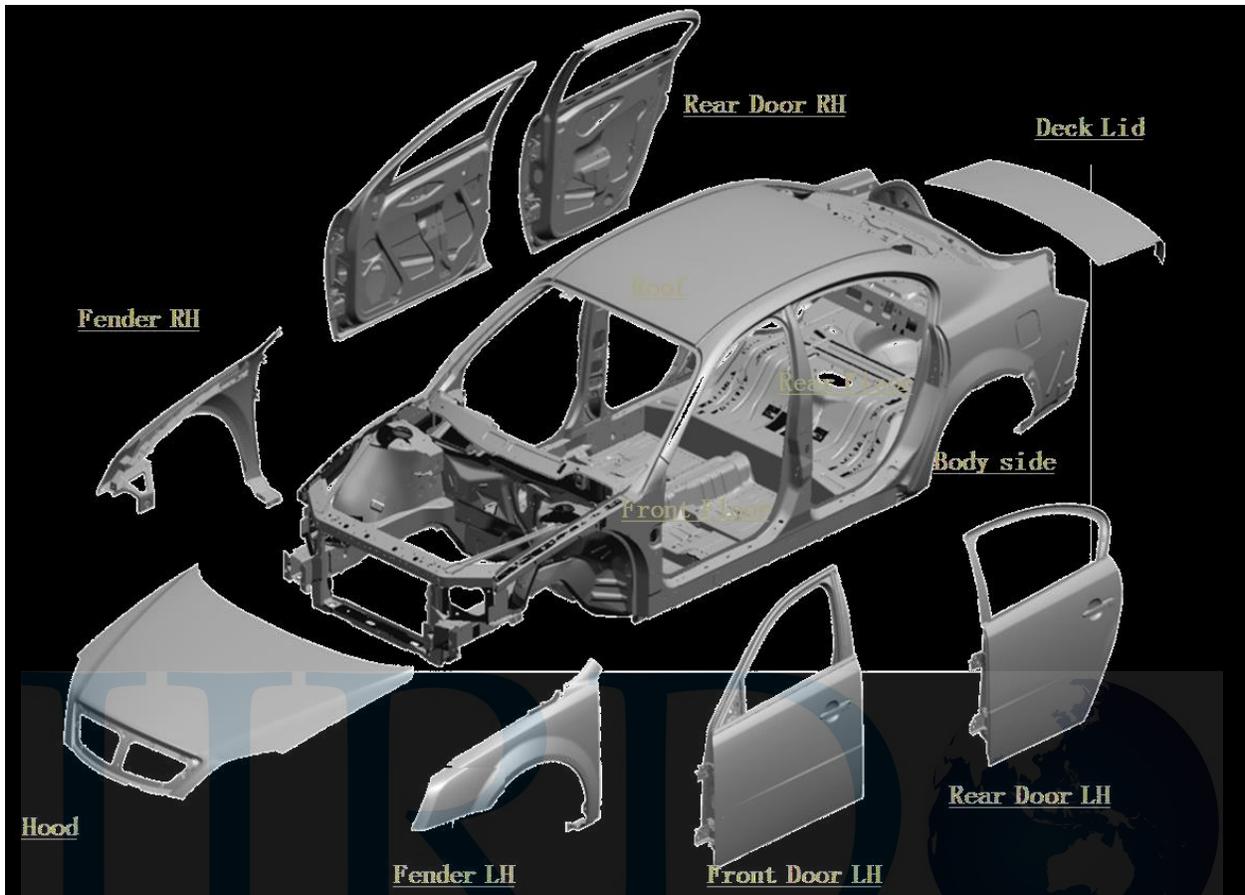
AUTOMOBILE BODY THAT CAN STAMPED OR PUNCHED(Allen Bradley)
